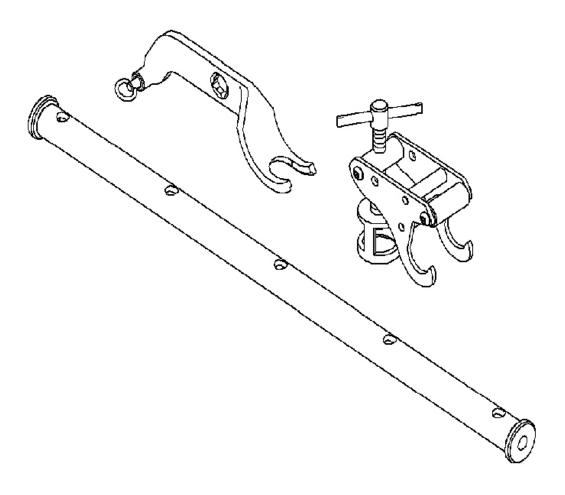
Valve Spring Compressor 9065A Courtesy of CHRYSLER LLC
